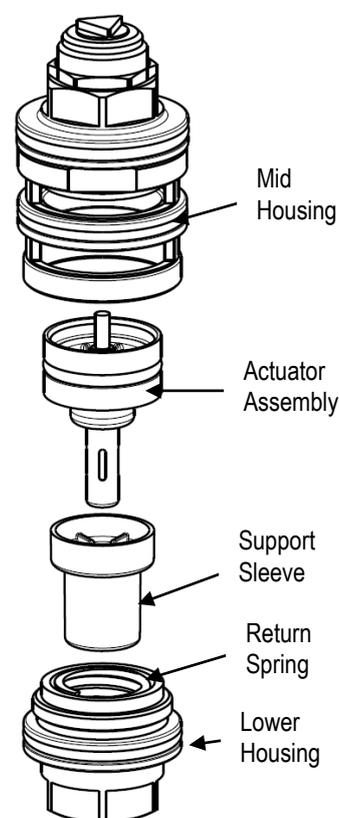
Replacing the Actuator Assembly (Element, Piston and O-ring): Thermostatic Cartridge Assembly
